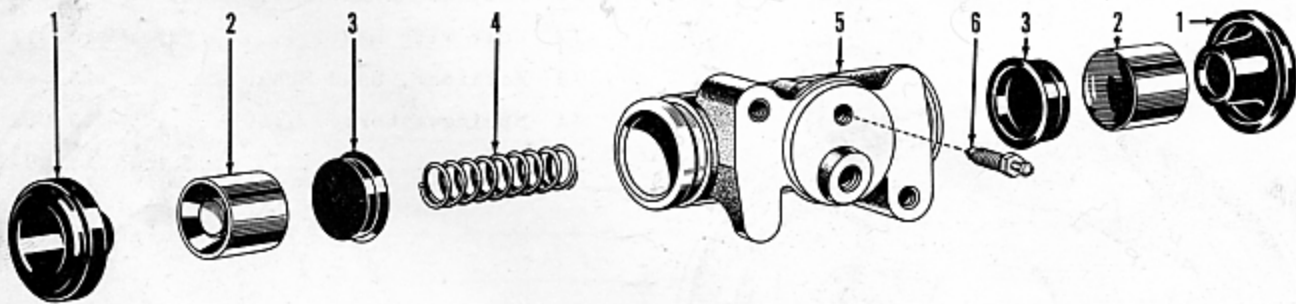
TYPICAL REAR WHEEL BRAKE CYLINDER - EXPLODED VIEW
